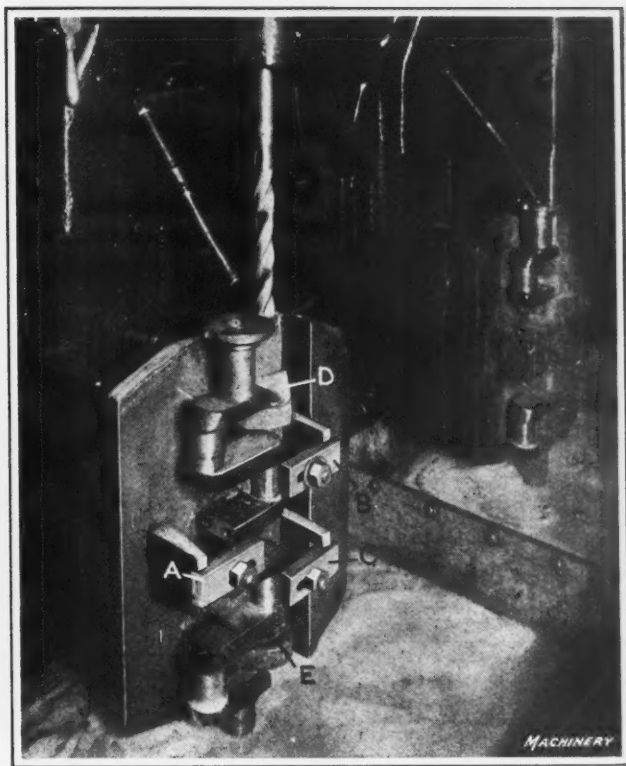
Drilling Machines provided with Indexing Jigs for drilling Axial Holes through the Crankpins
